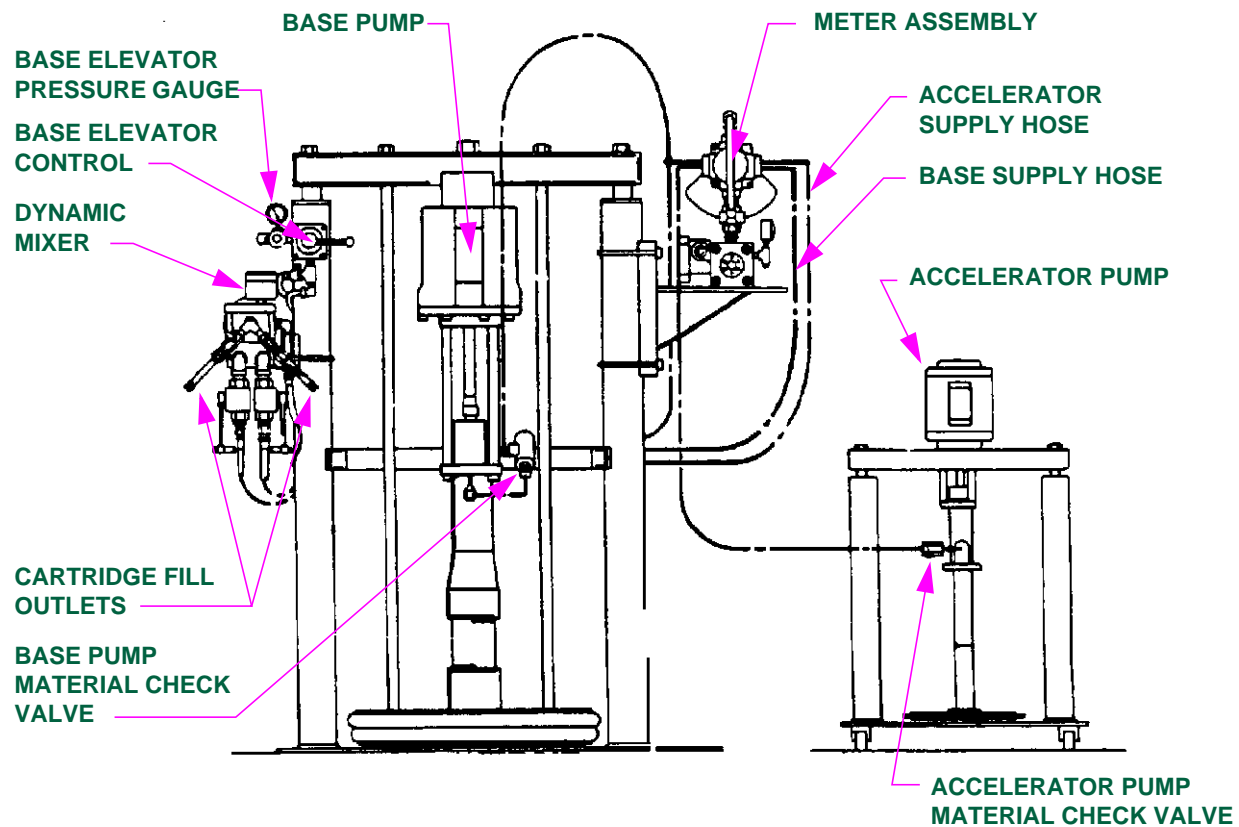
SEALANT MIXING MACHINE COMPONENTS
